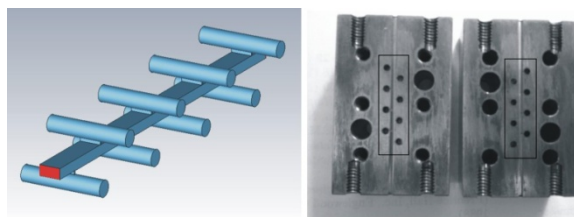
The filter design consisting of a waveguide and 8 cylindrical cavities (left). The flat surface in red colour is the connection port. The mechanical blocks milled out from two mirrored parts (right). The two blocks confine 8 cylindrical cavities giving rise to a single notch with rejection better than 50 dB (see Figure 32).
